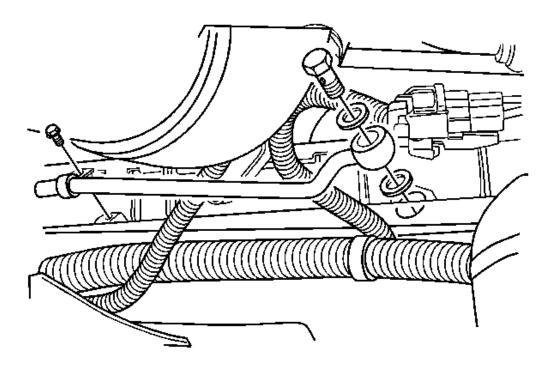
Do Not Use Plastic Cap On Cooler Line In Order To Install Cooler Line Into Fitting Courtesy of GENERAL MOTORS CORP.
